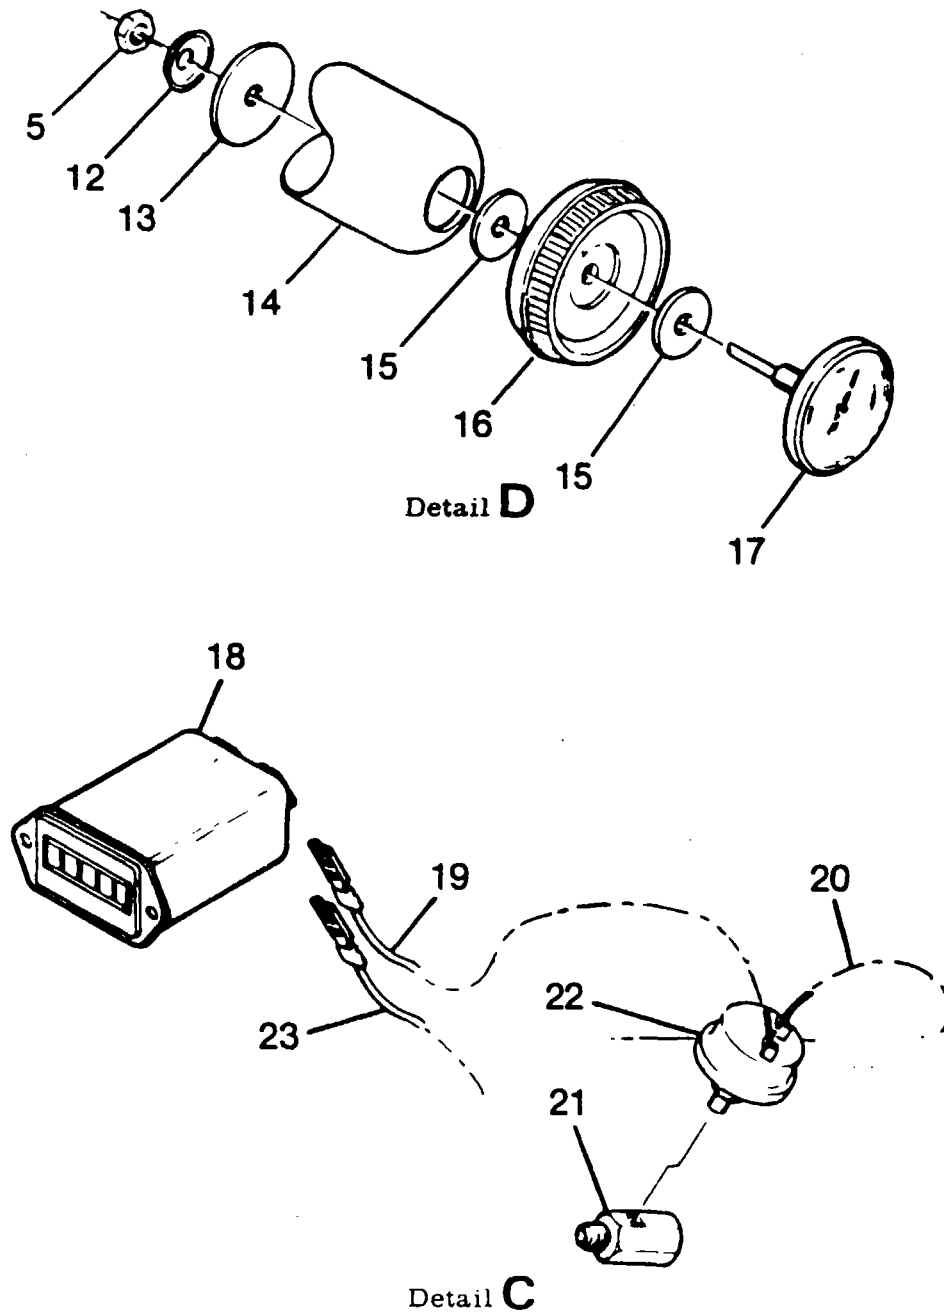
Compass, O.A.T. Gage and Hourmeter Installation (Sheet 2 of 2).
